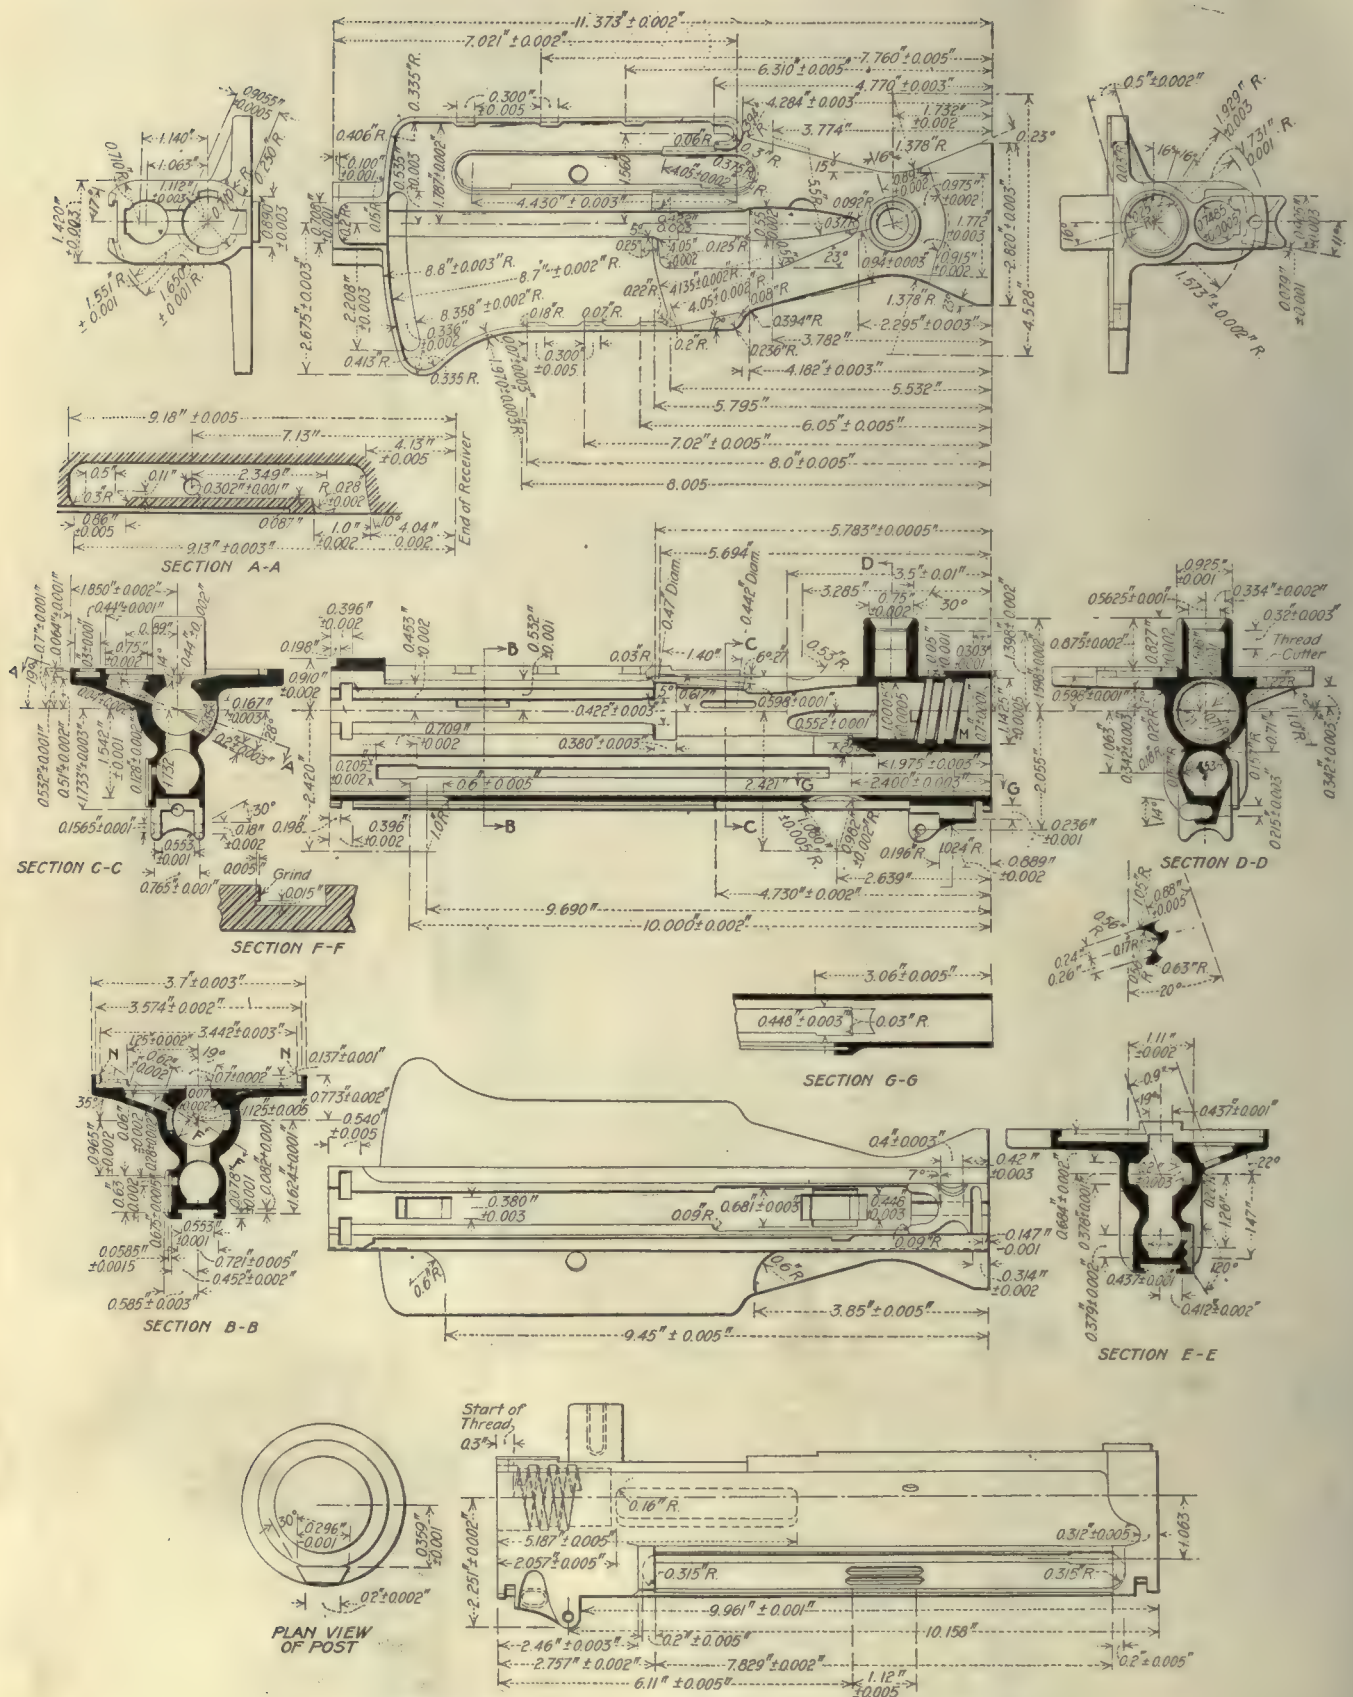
RECEIVER DETAILS WITH LIMITS AND TOLERANCES
